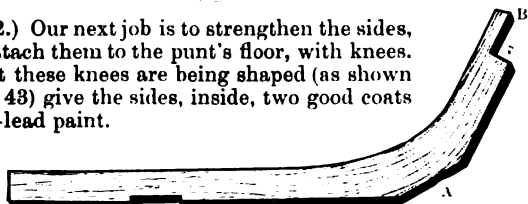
SIDE-PLANK KNEE, SHAPED TO THE SLOPE OF THE SIDE, AND CUT, AT A, TO PASS OVER AND SLIGHTLY INTO ($\frac{1}{2}$ in. deep) THE FLOOR-EDGE STRIP.* THE OPENING UNDER THE LONG PART OF THE KNEE FITS OVER THE FLOOR-JOINT STRIP ON ONE SIDE OF THE PUNT'S FLOOR. THE STEP, B, AT THE TOP OF THE KNEE IS MORTISED IN NEARLY FLUSH WITH THE STRIP (A, fig. 41) JUST FIXED AT THE TOP OF THE SIDE PLANK, AND TO WHICH IT IS NAILED (fig. 44)
